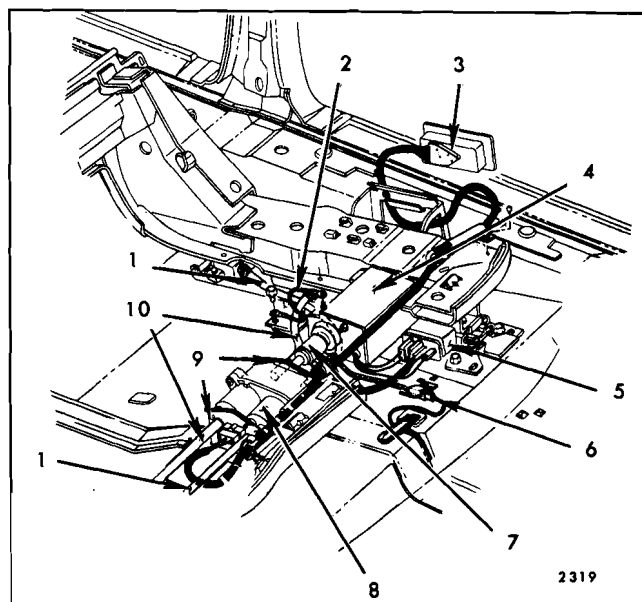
Four-Way Bench Seat Wiring - "B & C" Styles
